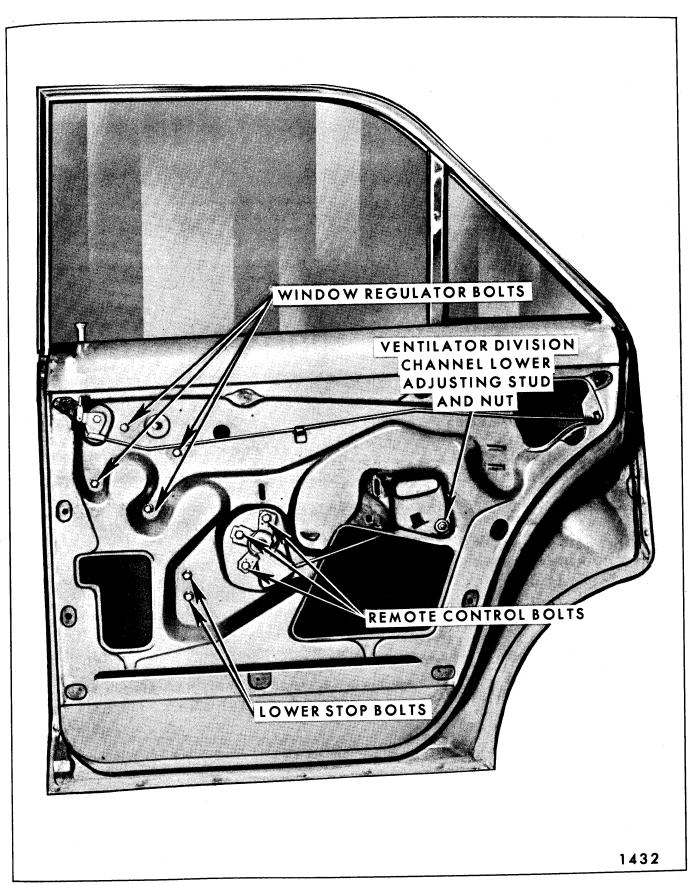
Rear Door Hardware - "X-35 and 69" Styles
